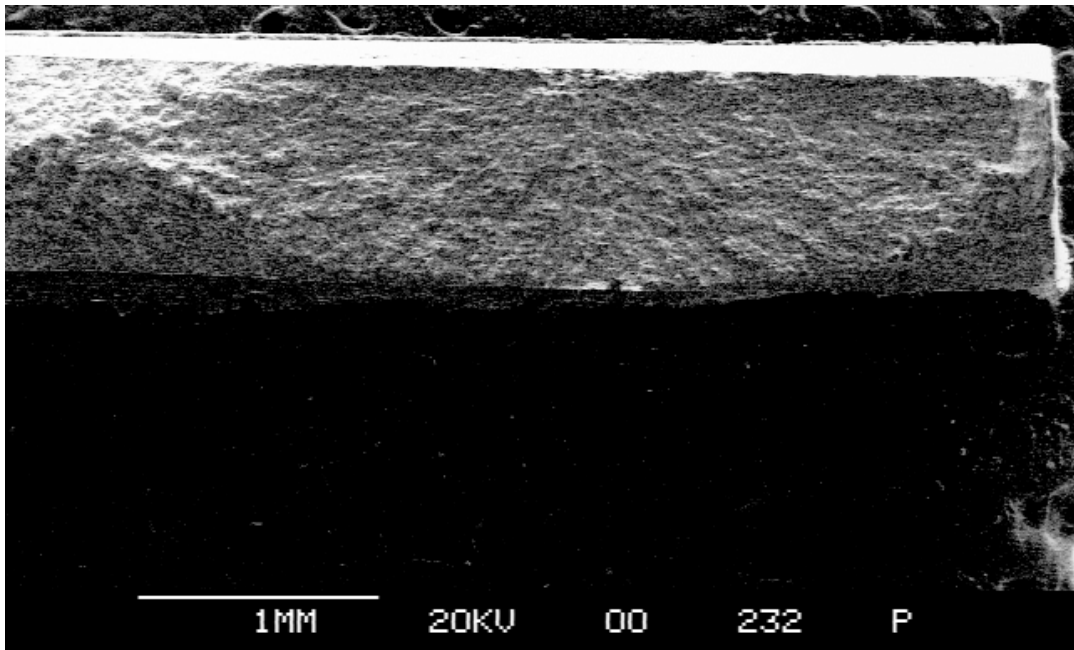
Fatigue Crack on Fracture Surface of Specimen 5925.
